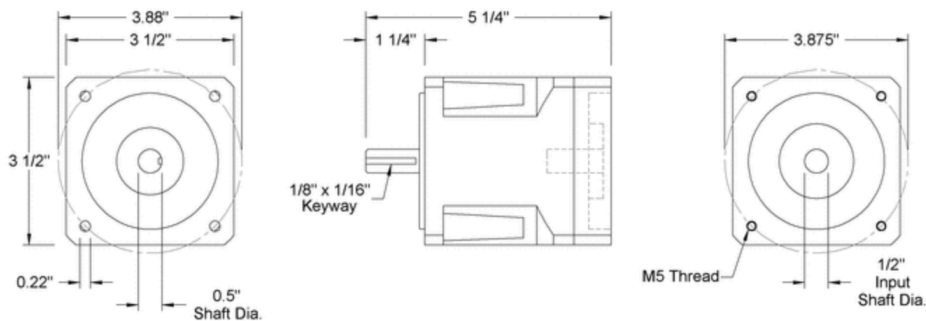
Engineering Drawing of Parallel Speed Reducer [28]
